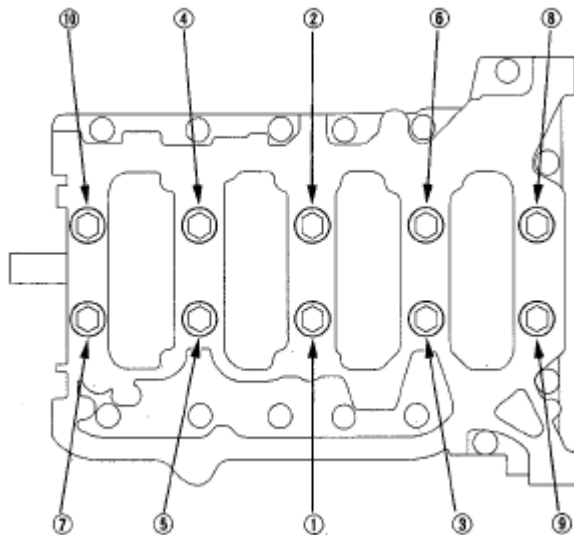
Identifying Tightening Sequence Of Bearing Cap Bolts
